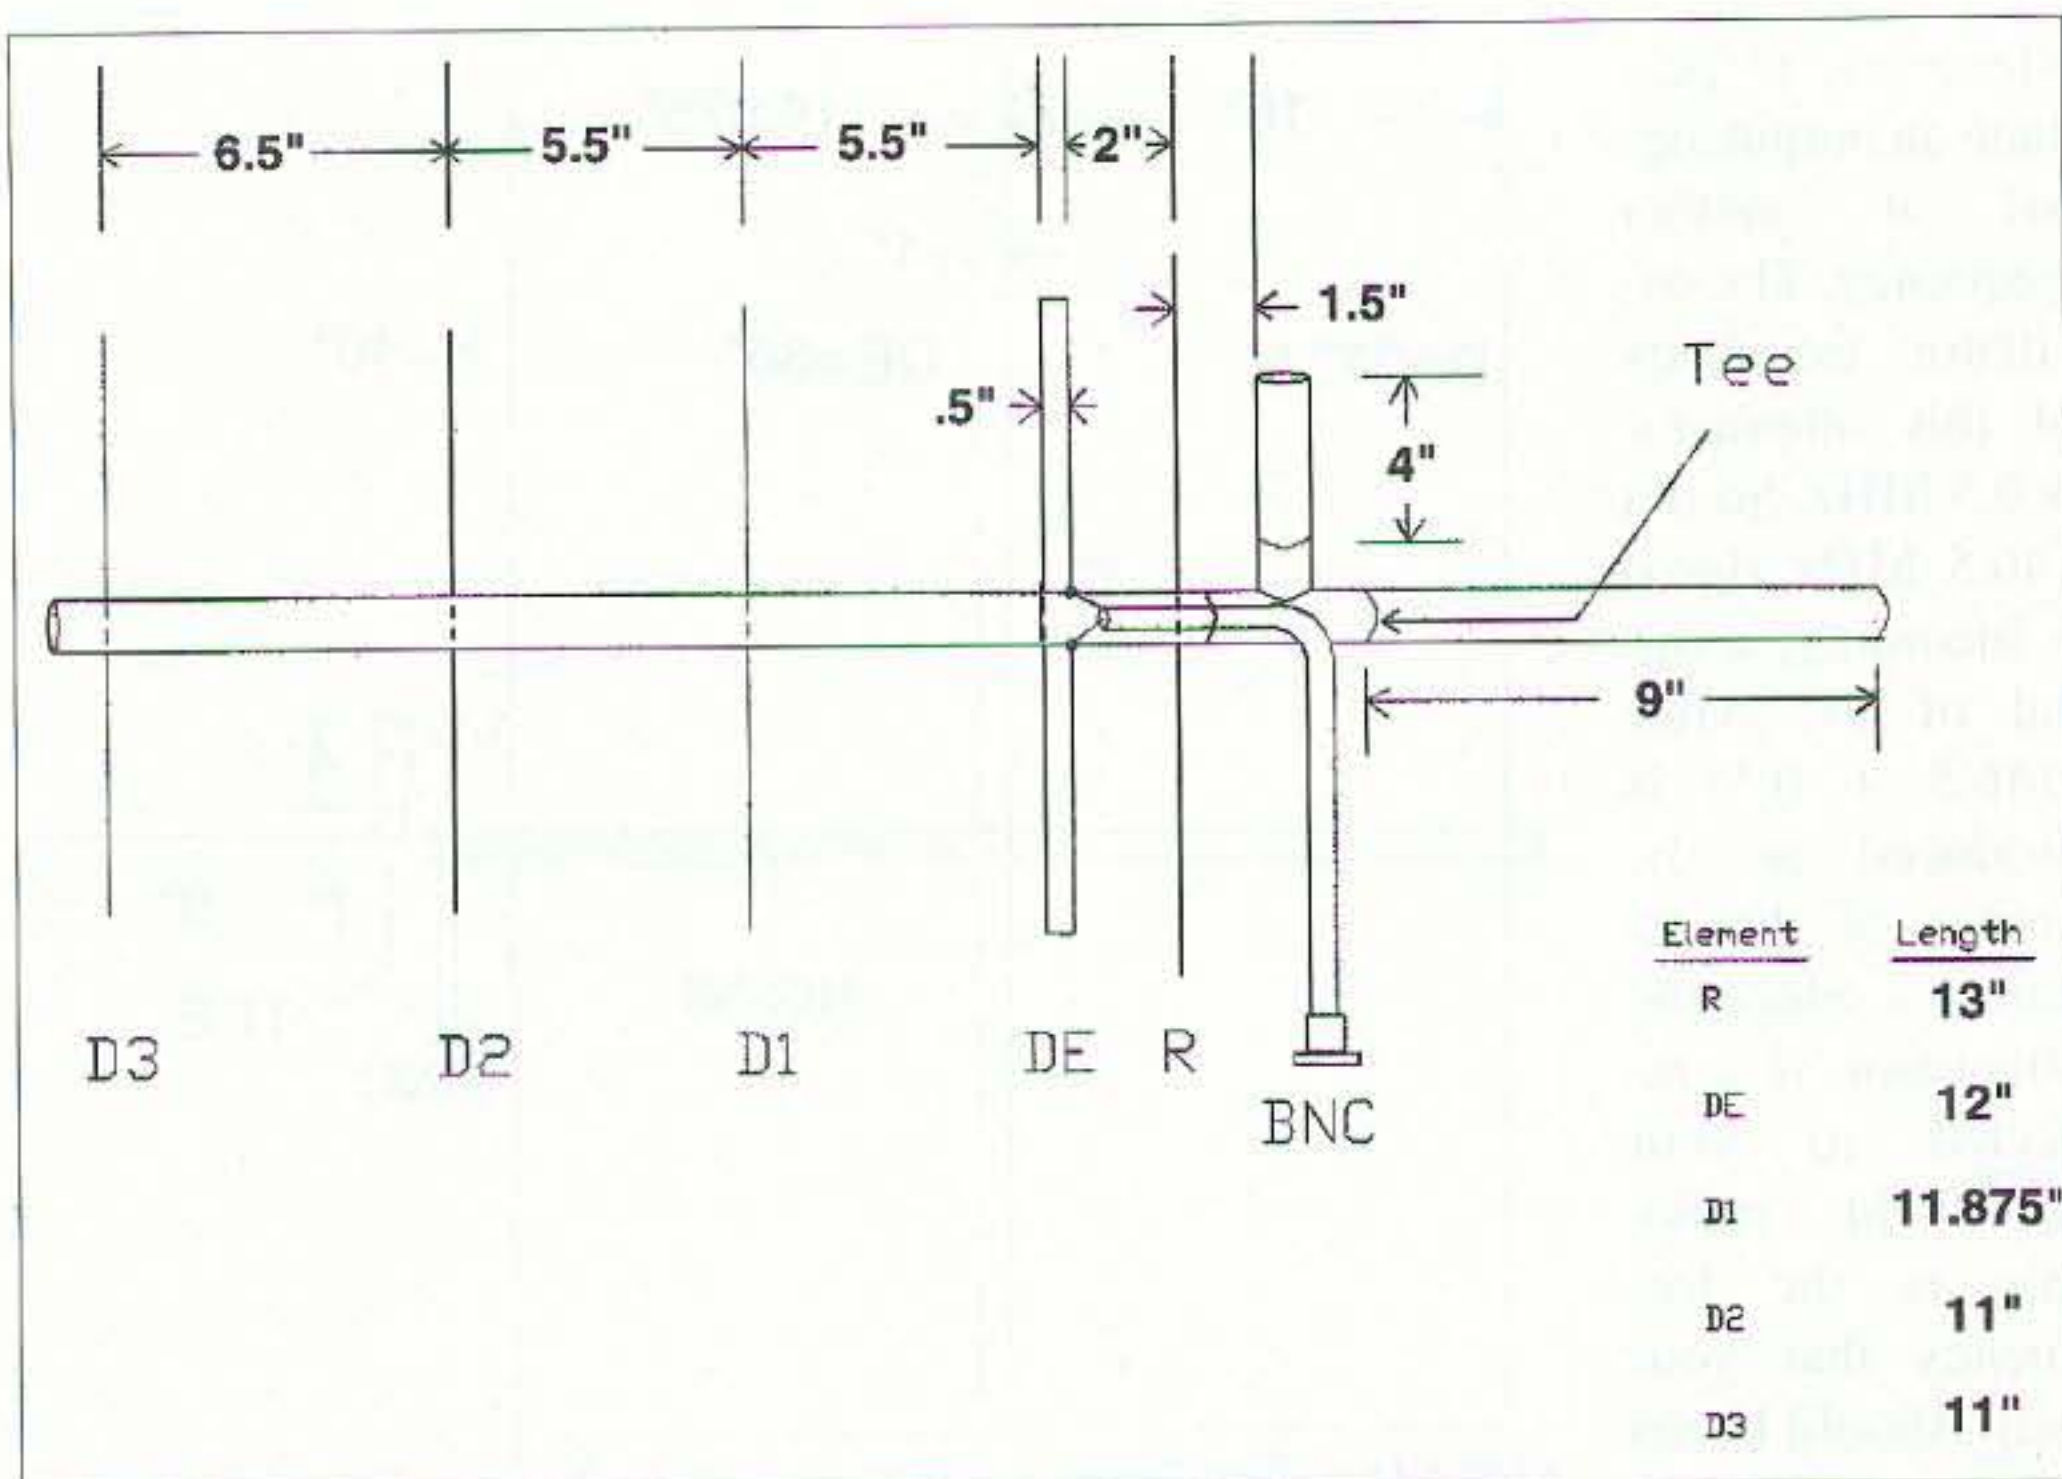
Dimensions and construction of the 70 centimeter T-hunt beam.
